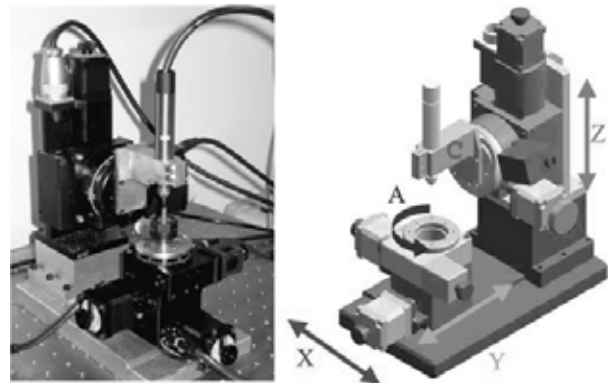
A 5-axis micro milling machine for machining micro parts [7].
